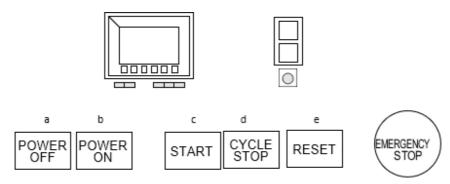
Buttons on the front panel of a pick and place machine
